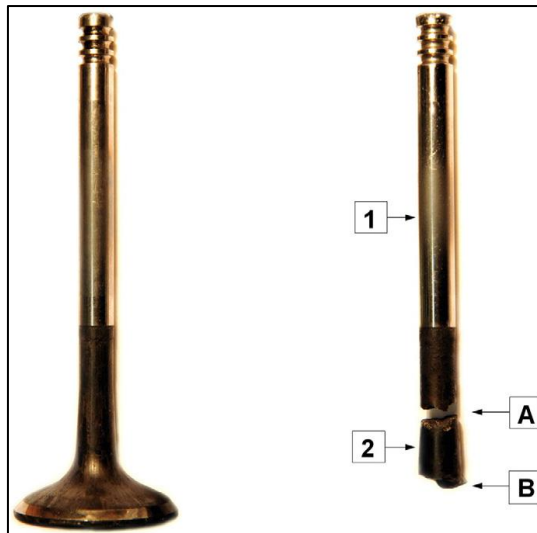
8 Valve Stem Failure (Witek, 2016)
